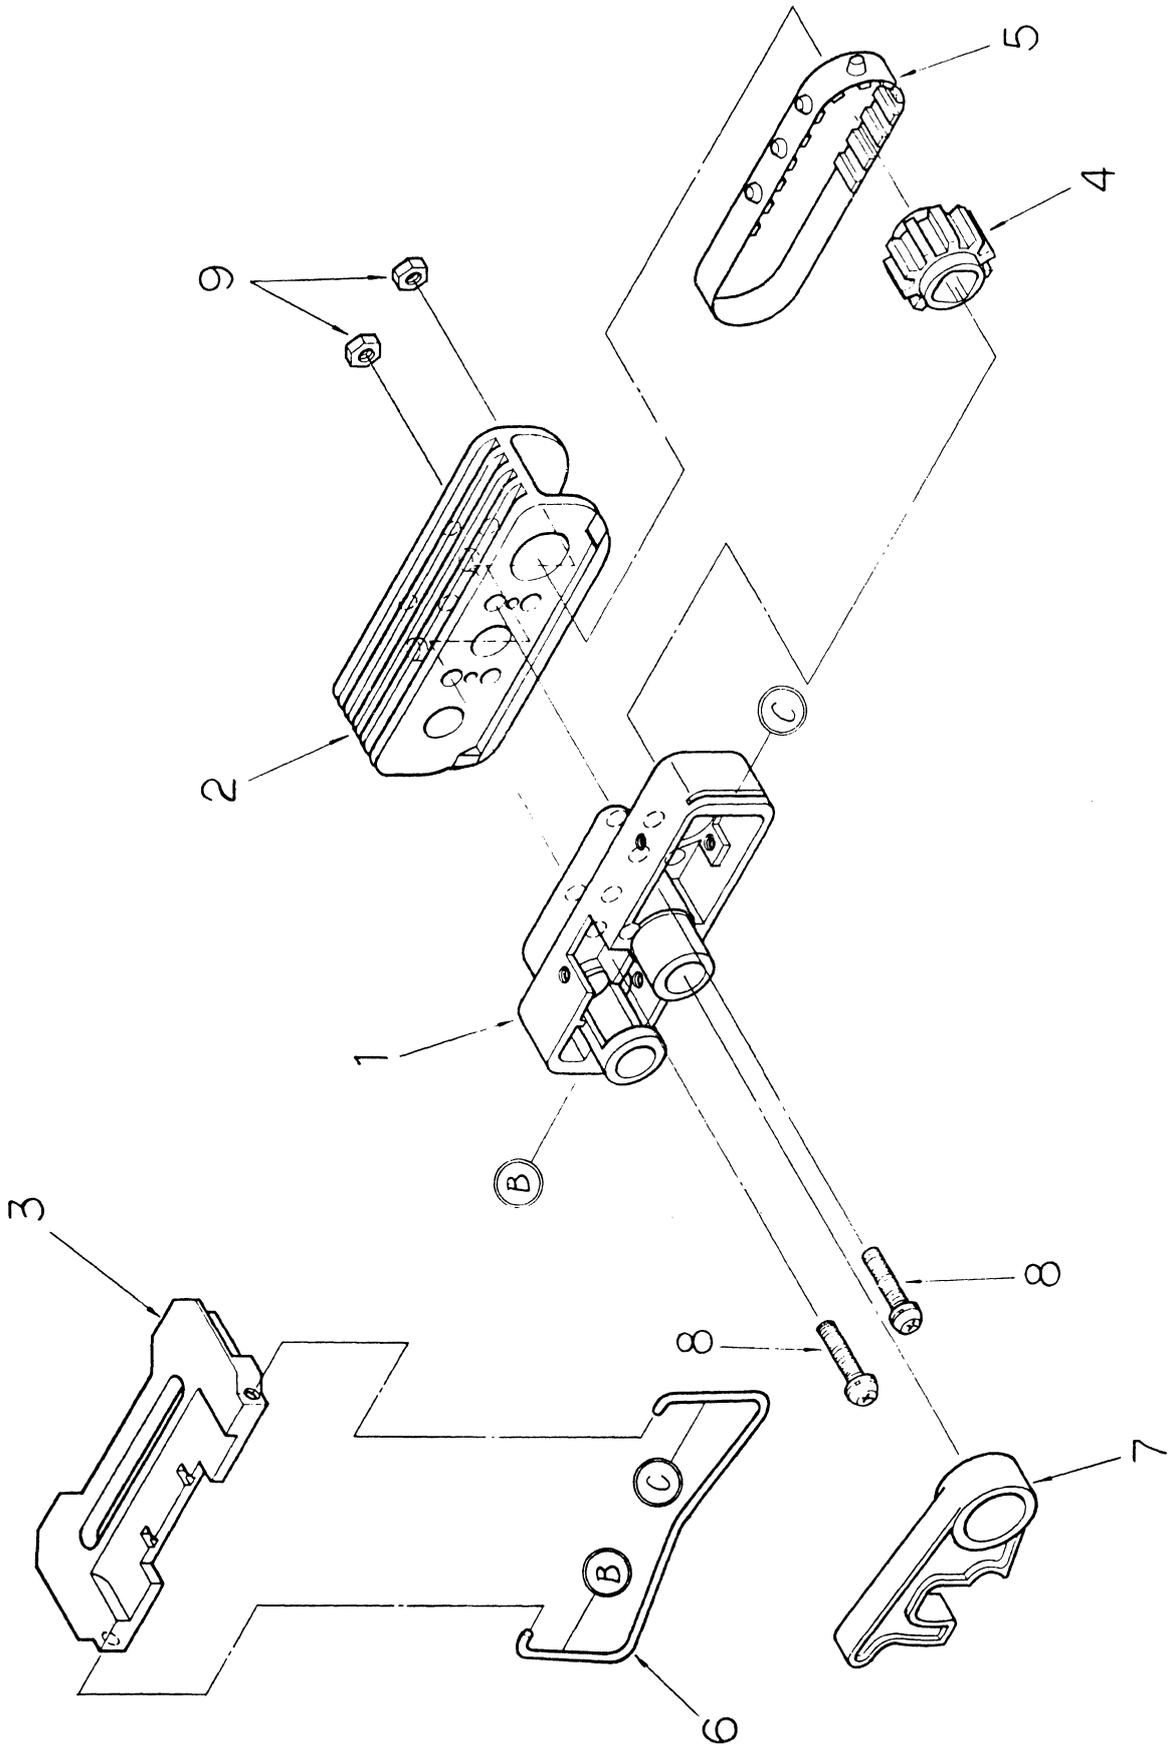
Sprocket Assembly (L) (FMX-35150-2)
